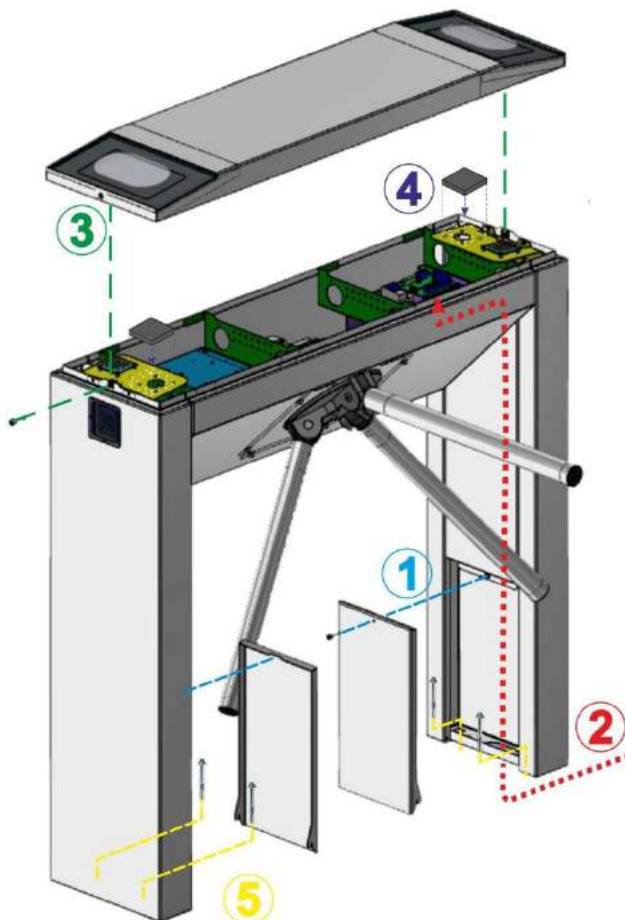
General view of the "TWIX-M" tripod turnstile assembly
